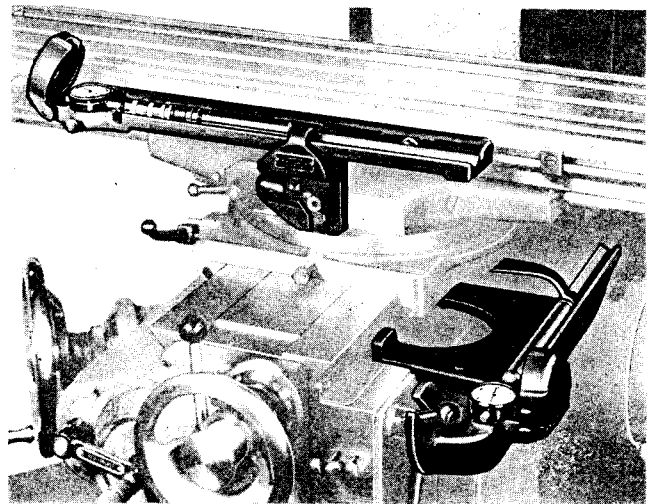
No. 0 Micrometer Table Setting Attachment.
